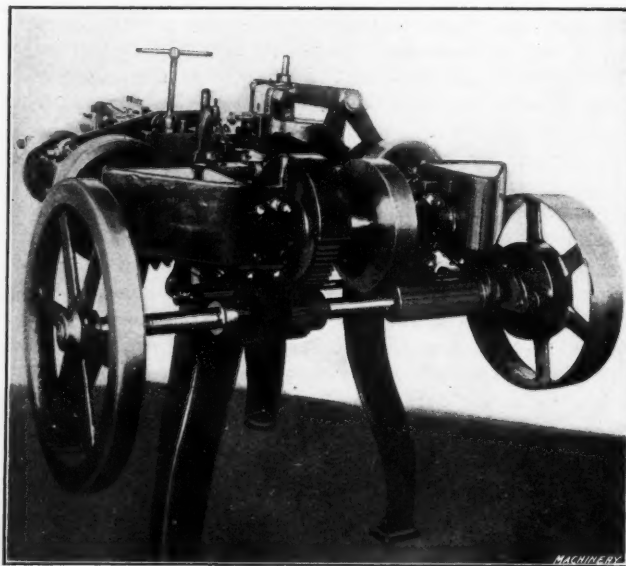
Typical Four-slide Wire-forming Machine shown from another Angle than in Fig. 6
